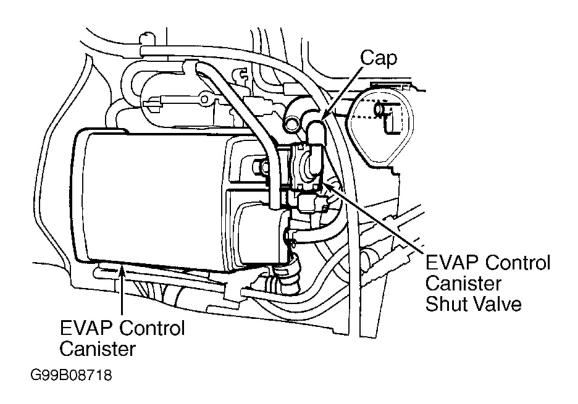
Removing Vent Hose From EVAP Canister Vent Shut Valve Courtesy of AMERICAN HONDA MOTOR CO., INC.
